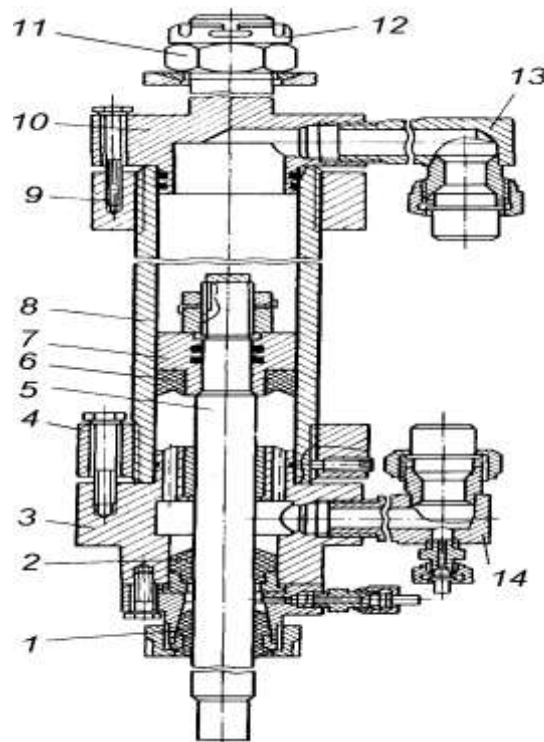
Single-acting hydraulic cylinder with a single-acting rod of a unified rod pump unit.
